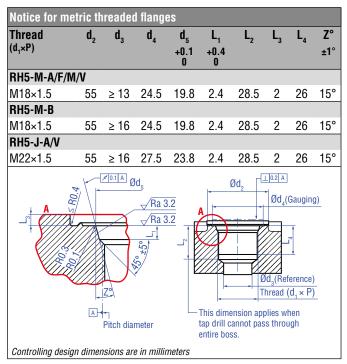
Notice for metric threaded flange M18×1.5-6g/M22×1.5-6g based on DIN ISO 6149-1
